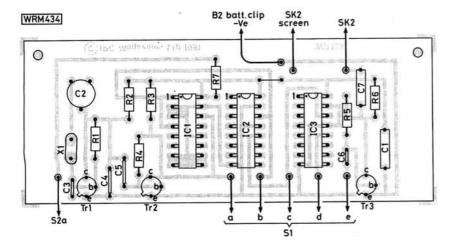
(Left) the component placement drawing of the p.c.b. The picture at the top of the page shows the internal layout of the calibrator
